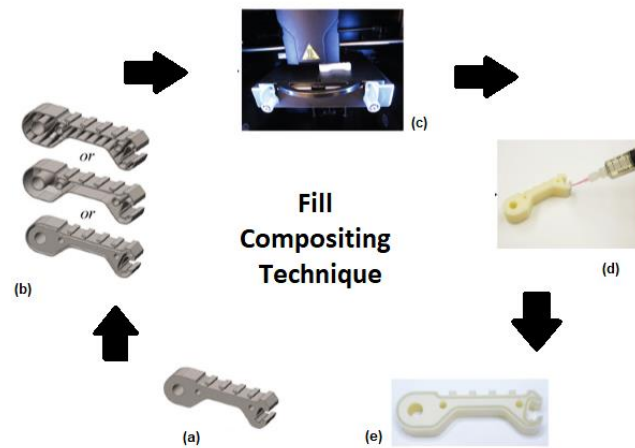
Fill compositing technique and its steps: (a) original part model; (b) modify part with internal voids; (c) print part using FDM; (d) inject resin into internal voids; and (e) section view of final model. Adapted from [70].
